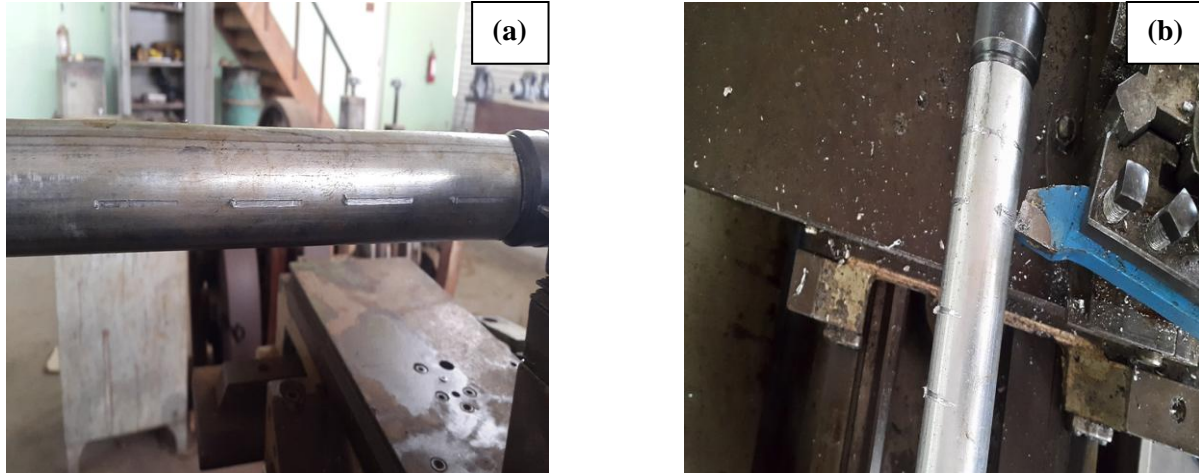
Different side view of the tested cracked device (a) Longitudinal (b) Axial
